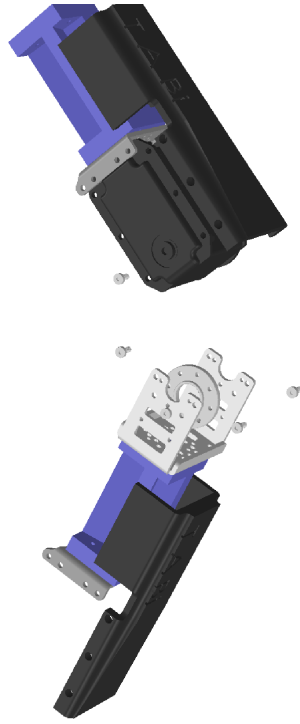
An exploded view of a knee joint of the Biped walker Prototype
